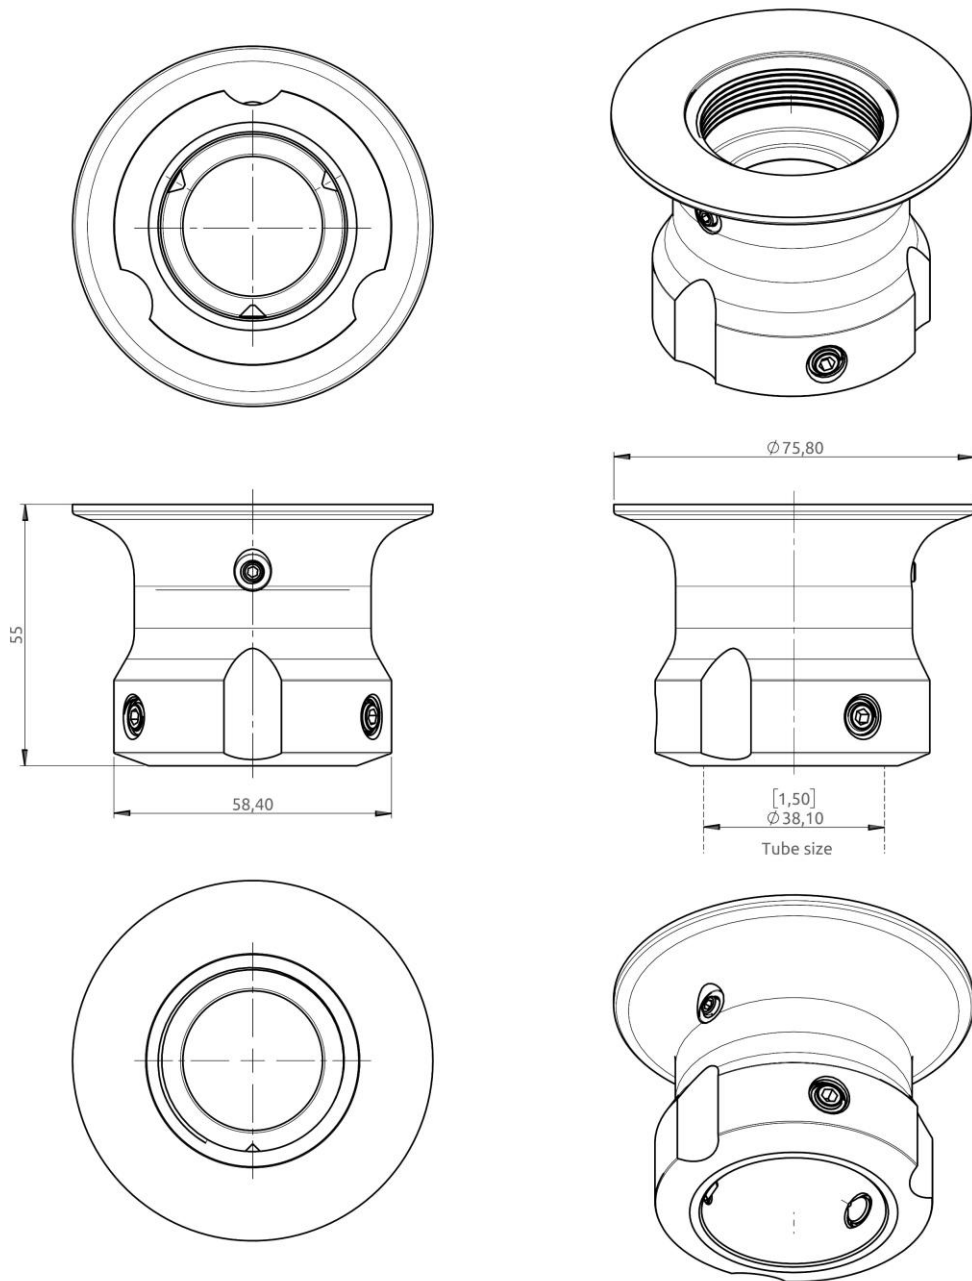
Outline Drawing: Pole Mount (1.5" tube), Antenna Unit
